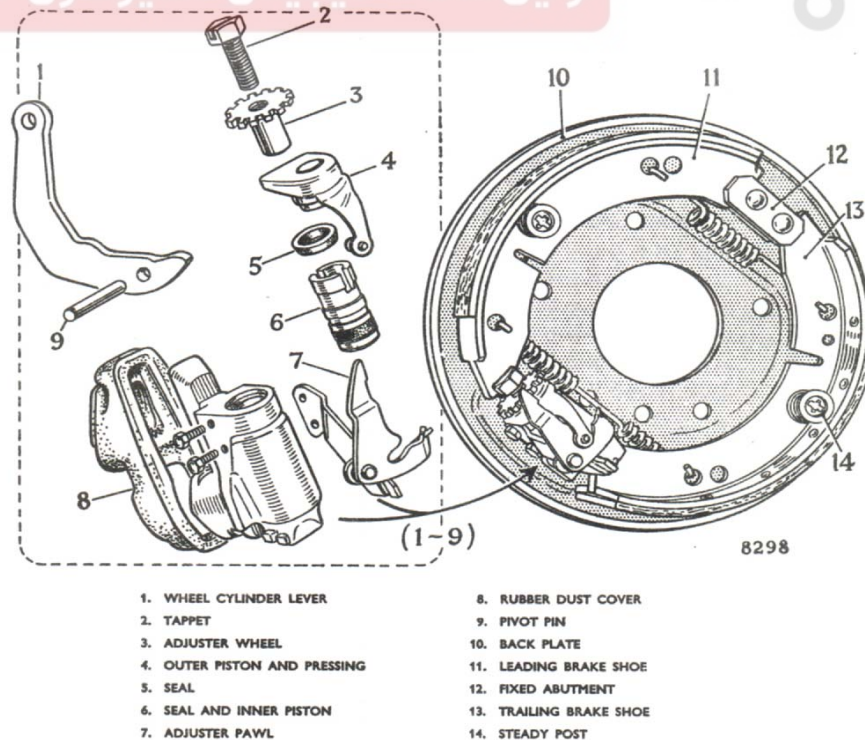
Exploded view of right-hand rear brake back plate assembly
